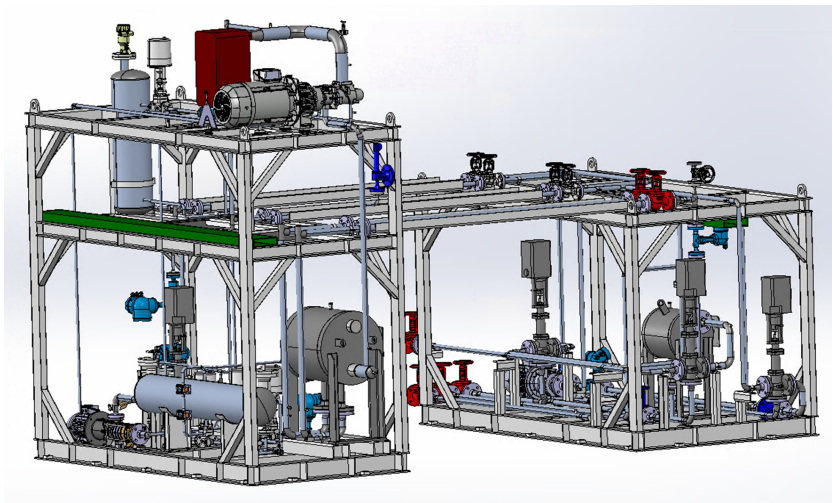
3-D design of the experimental high-temperature heat pump - view 2.
